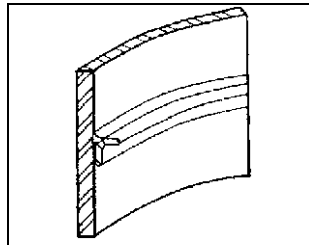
Tray support, full seal weld top — good crevice resistance
